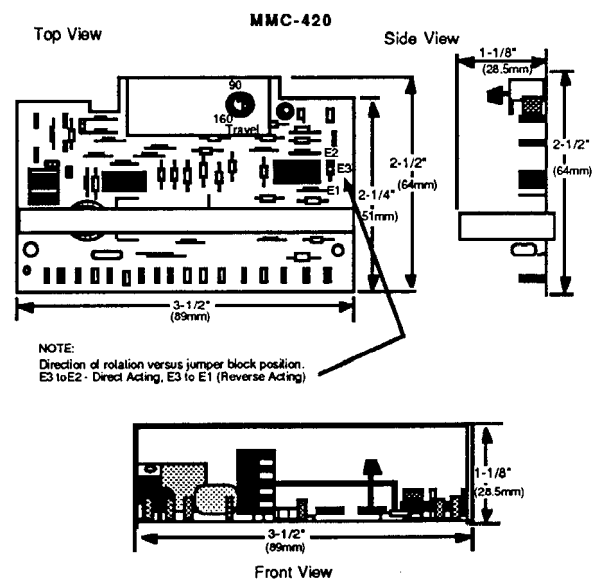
MMC-420 Plug-In Control Module Dimensions.
